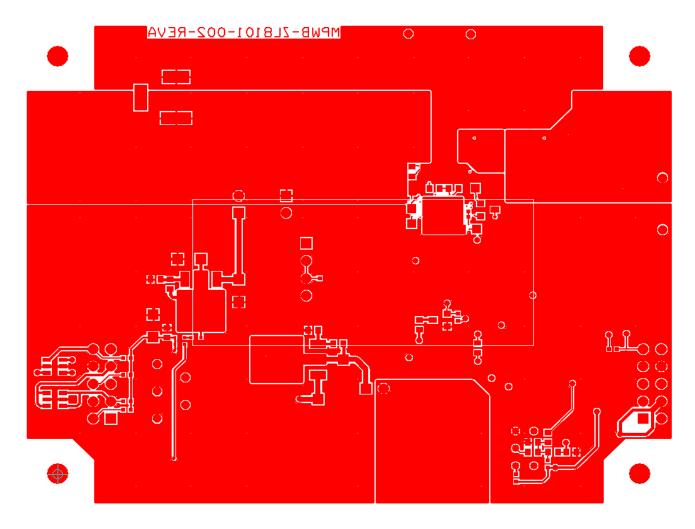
PCB - BOTTOM LAYER (VIEWED FROM TOP)
